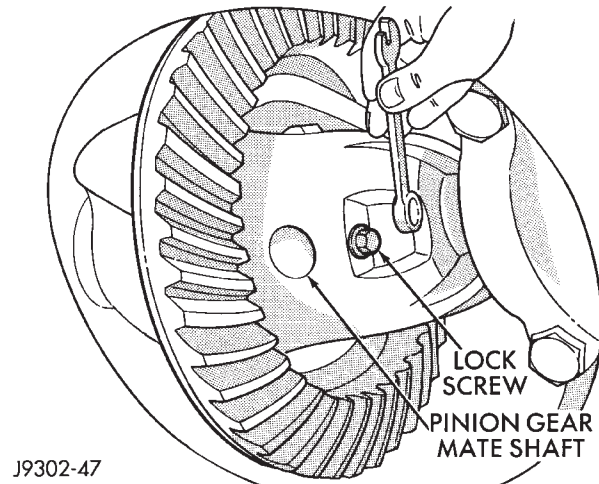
Pinion Gear Mate Shaft Lock Screw
